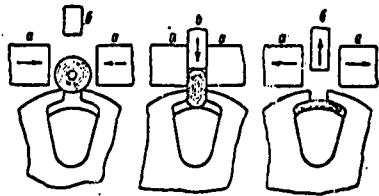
Scheme of mechanical mounting of windings into the recesses.
